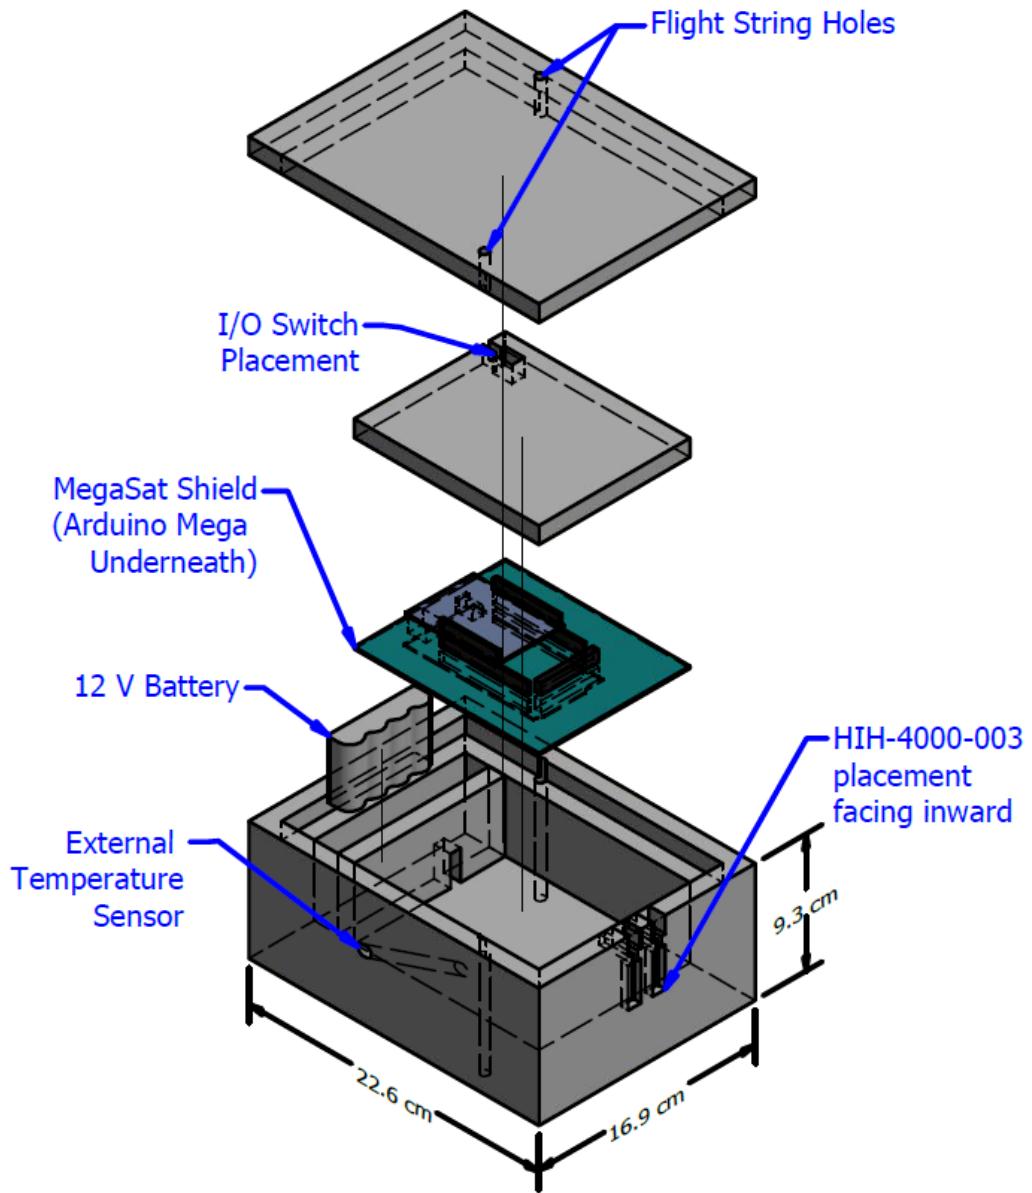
Mechanical Drawing of DemonSats-2 Enclosure
